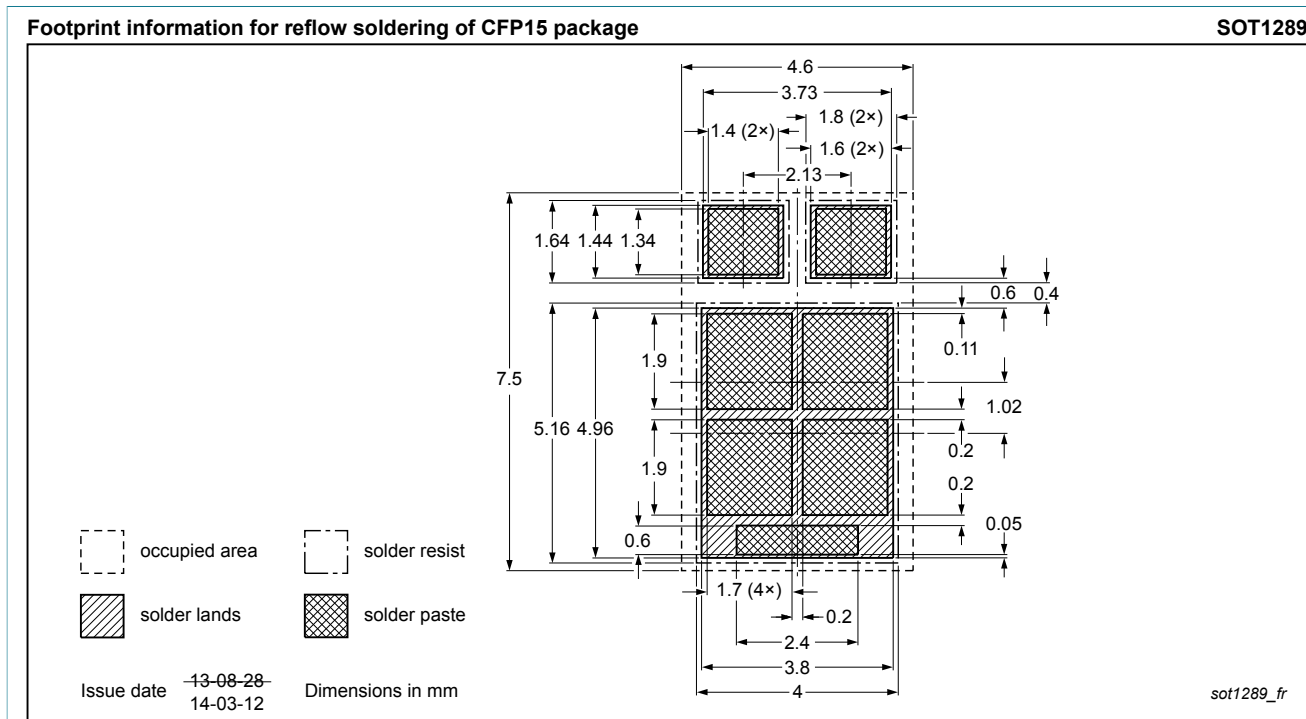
Reflow soldering footprint for CFP15 (SOT1289)
